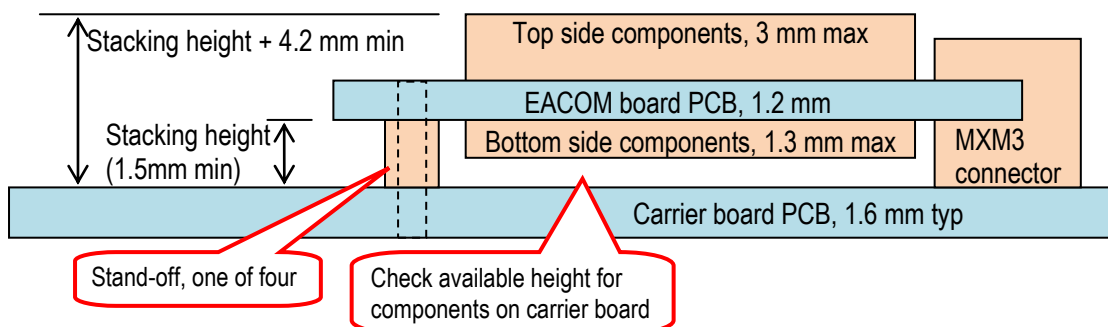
COM Board Mounting in MXM3 Connector, Stacking Height
